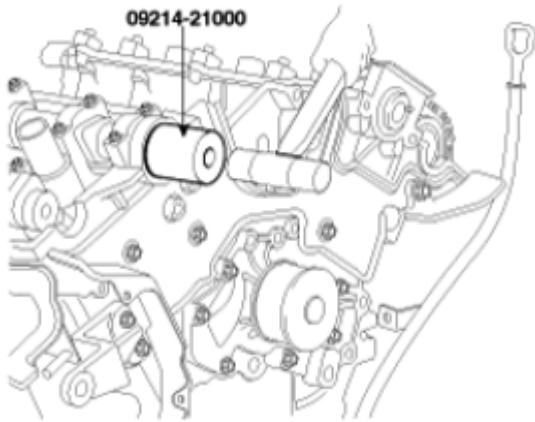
Installing Camshaft Bearing Oil Seal Using SST (09214-21000)
